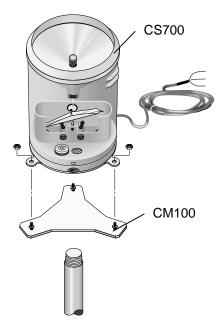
CS700-L Rain Gage and CM100 Mounting Bracket
